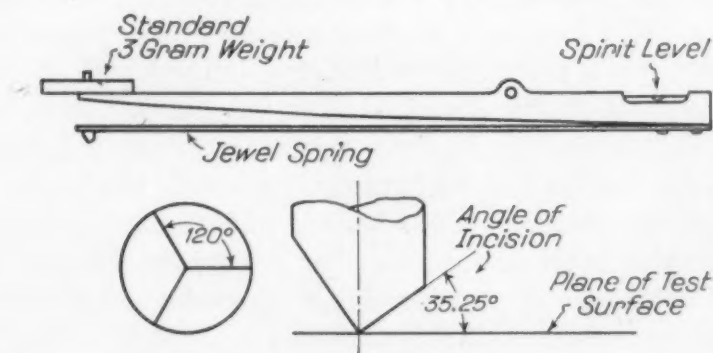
Showing Shape of Cutting Point and Also the Method of Elastically Mounting.
